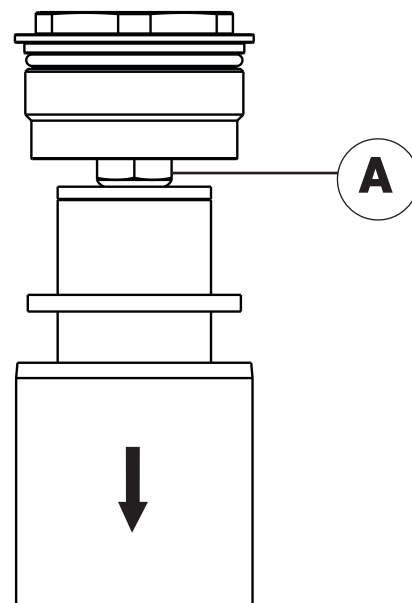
Lower the upper tube and loosen the cinch nut (A) from the top cap.
